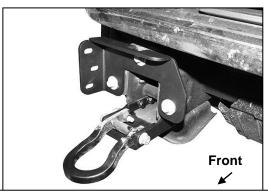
12mm Single Bolt Plate and 12mm Double Bolt Plate
